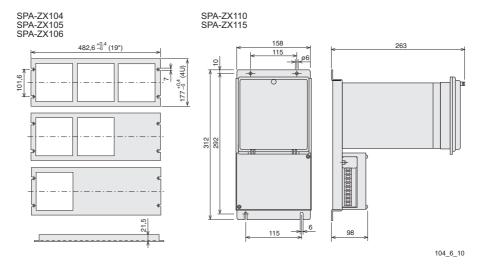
Mounting cabinets and frames as well as projecting mounting (dimensions in mm)
